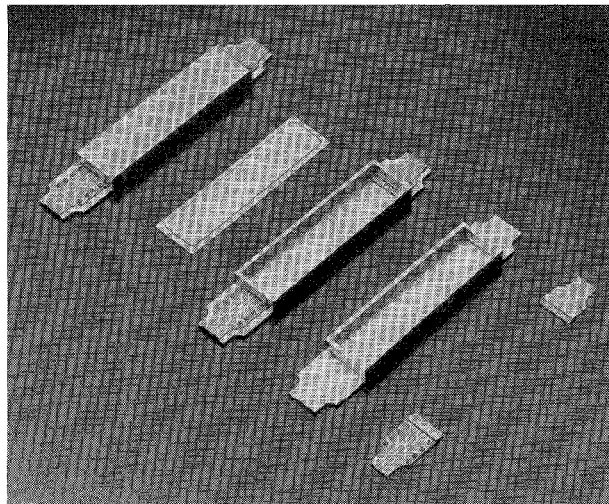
MMIC packages produced using metal injection molding of copper-tungsten. Ceramic feedthroughs are brazed into position through the openings left in the housing endwalls.
